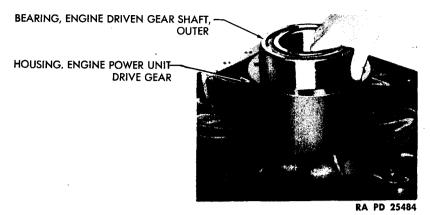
Installing Engine Driven Gear Shaft Outer Bearing
